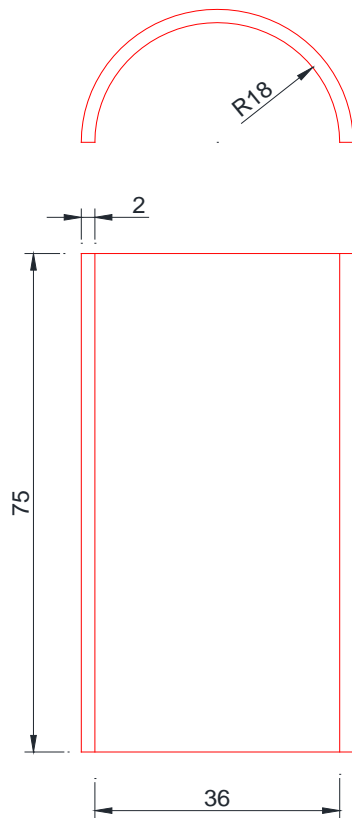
Dimensions (mm) of the semicircle shaped wind turbine blade
